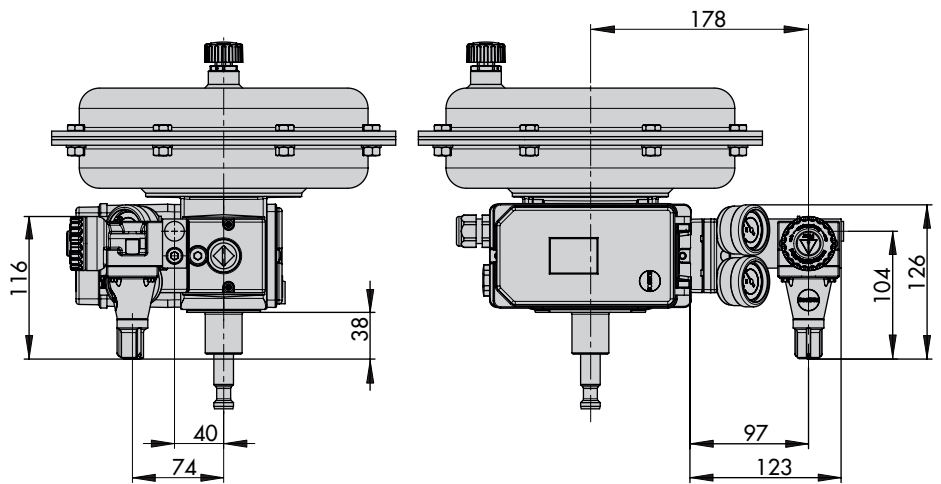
Type 4708-64xx for Type 3277 Pneumatic Actuator and Type 3725 Positioner
